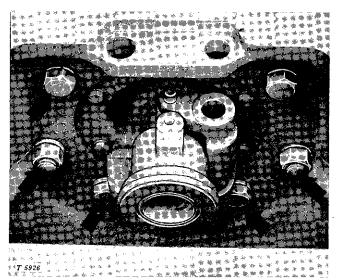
Clutch Throw-Out Bearing Assembly and Housing Attaching Hardware
